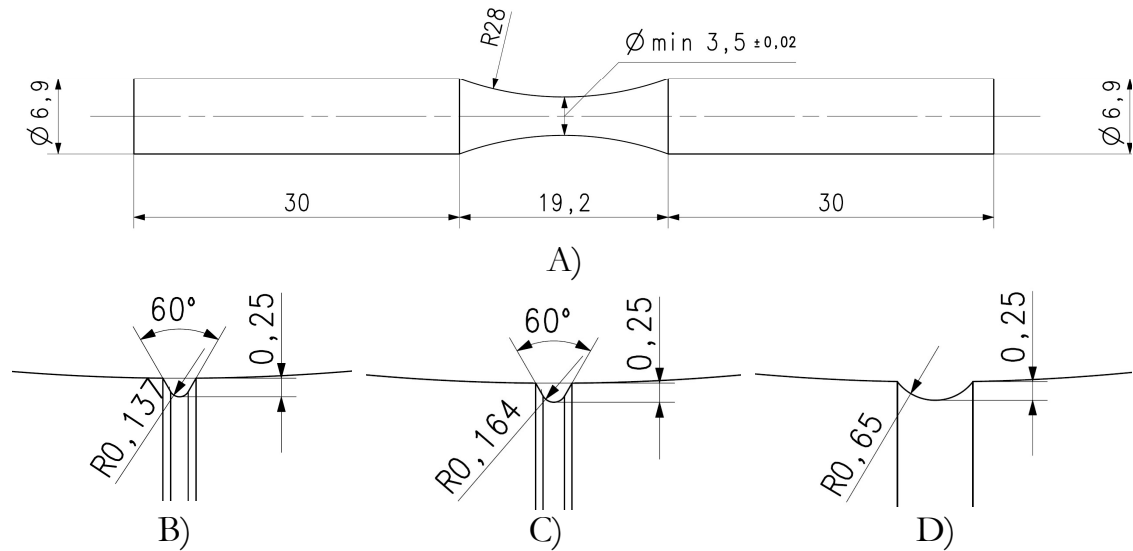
A, Unnotched hourglass specimens used for fatigue characterization of CP4 Titanium. B, Detail of R0.137 notched specimen. C, Detail of R0.164 notched specimen. D, Detail of R0.650 notched specimen.
